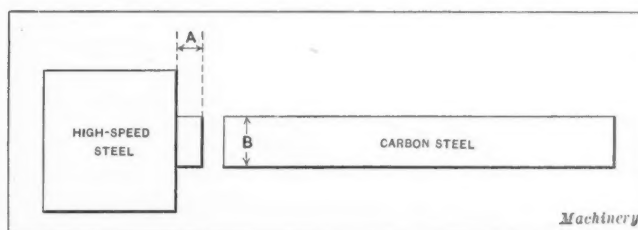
Showing Reduction Necessary on Large Piece before it can be welded to a Small Diameter Shank
